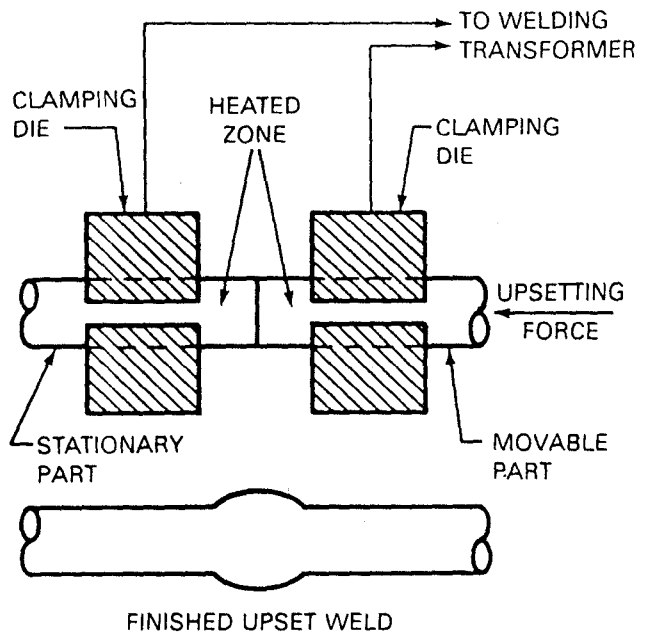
General Arrangement for Upset Welding of Bars, Rods, and Pipes
